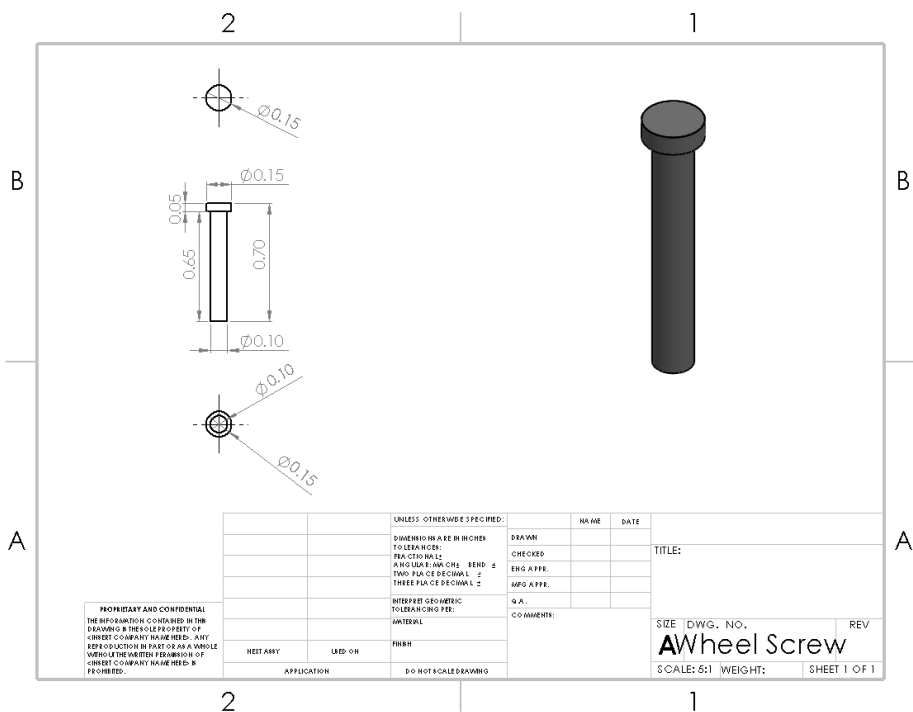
The sketch and dimensions of the wheel screws.
